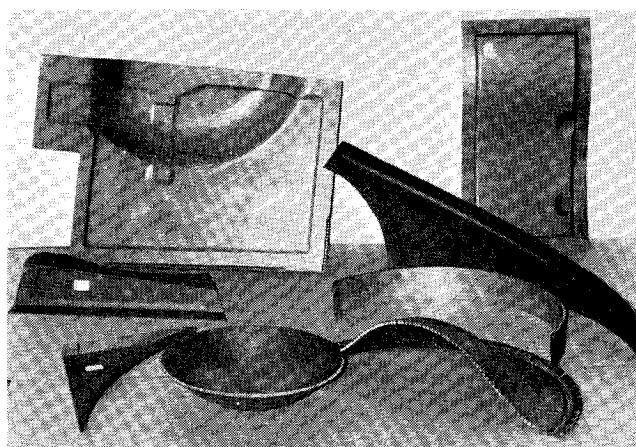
Representative sections of welded honeycomb. Parts were formed cold. Materials 15-7Mo steel and Inco 718.
